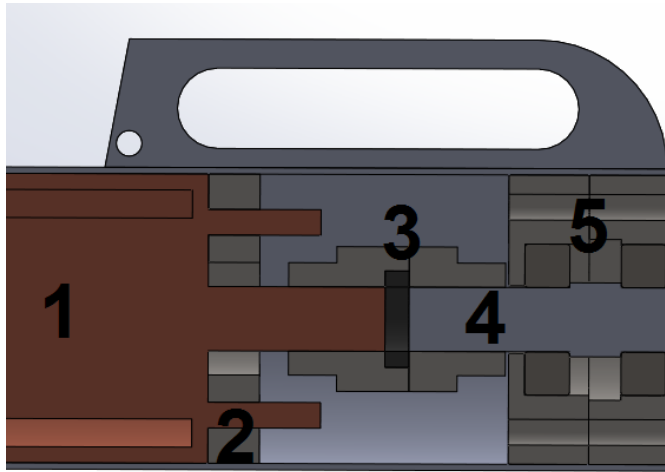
Shaft adapter and motor connection; (1) Motor, (2) Connection piece motor to outer pipe, (3) Elastic clutch to adapt axel diameters, (4) Second axel to propeller, (5) Shaft adapter, (6)
